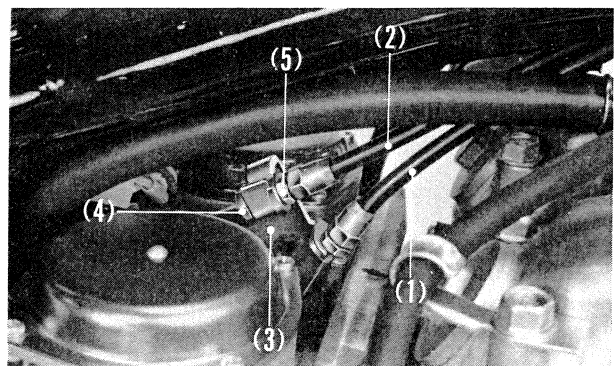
(1) "Closed" side cable (4) Lock nut
